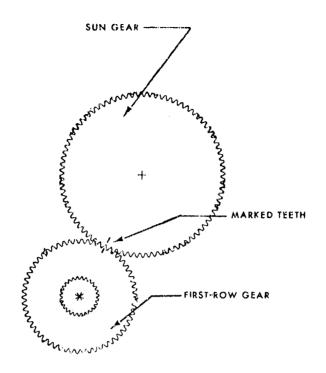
Initial Assembly, Sun/First-Row Pinion.
